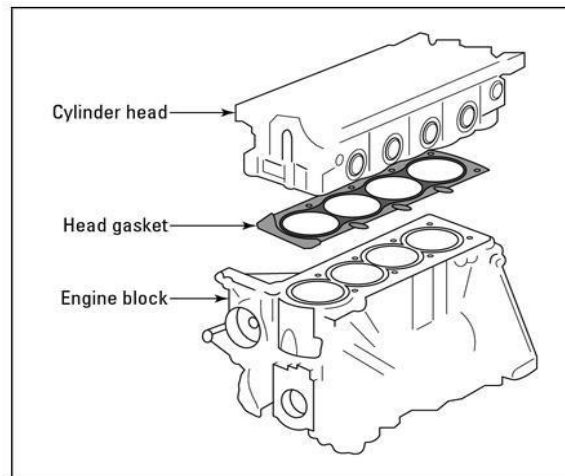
Assembly of Cylinder, Cylinder head and Gasket
